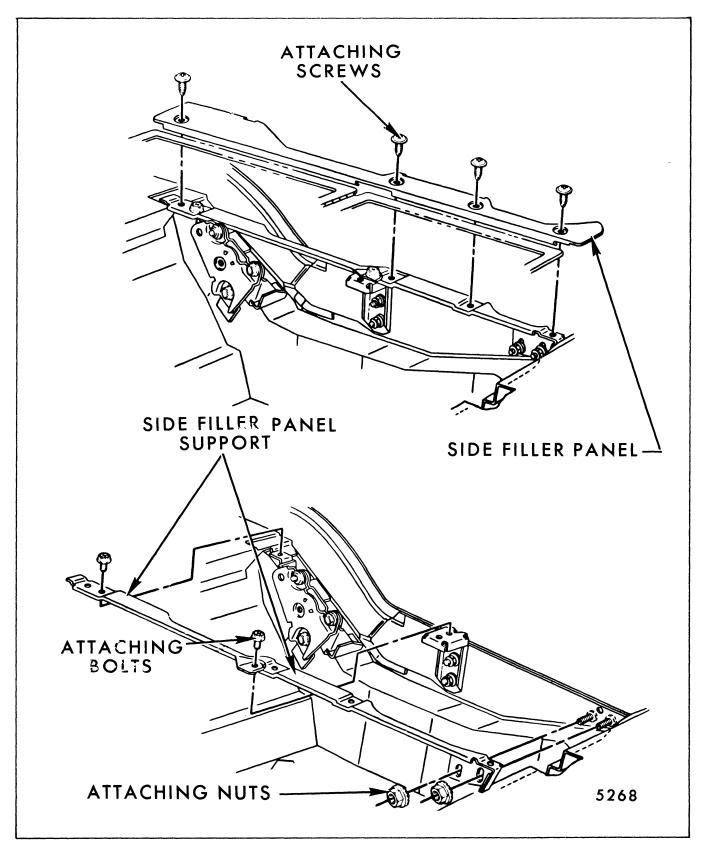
Rear Floor Side Filler Panel - "A" Three-Seat Styles
